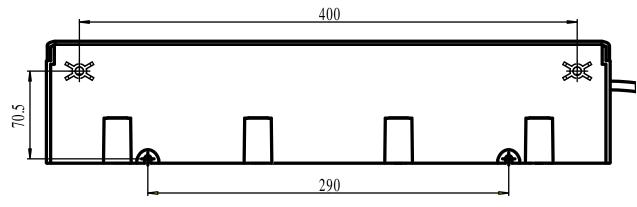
Mounting dimensions [mm] - Handset Charging Rack from the back
